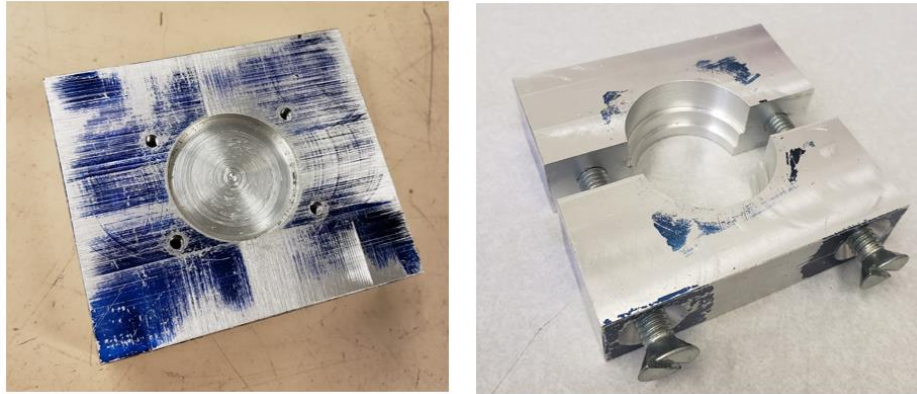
Fixturing devices manufactured for cylinder head post machining
